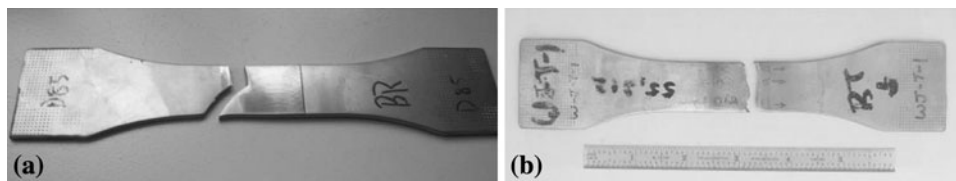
The photos shown are fatigue life test coupons that were both FSW welded in the transverse direction. They are shown after fracture during the fatigue test. (a) A coupon that has been machined before the fatigue test and (b) a coupon that was left with the as-FSW surface
